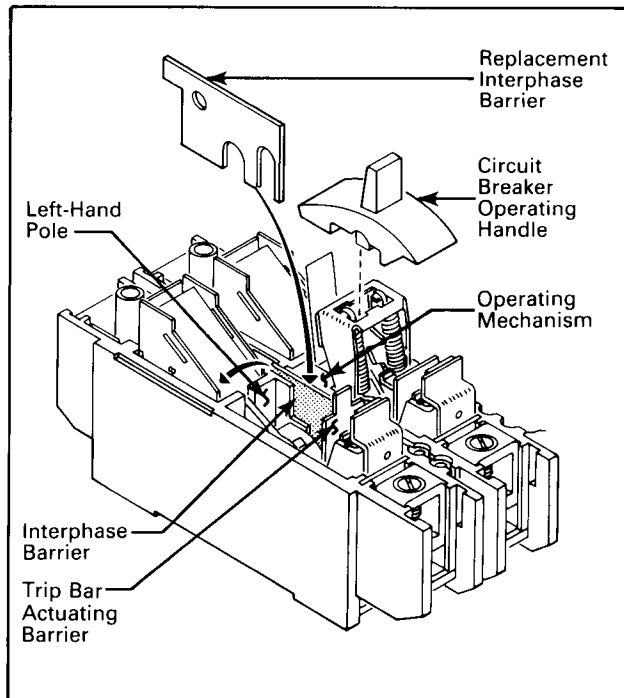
Circuit Breaker Base Assembly with Cover Removed. Replacement of Left-Hand Barrier
